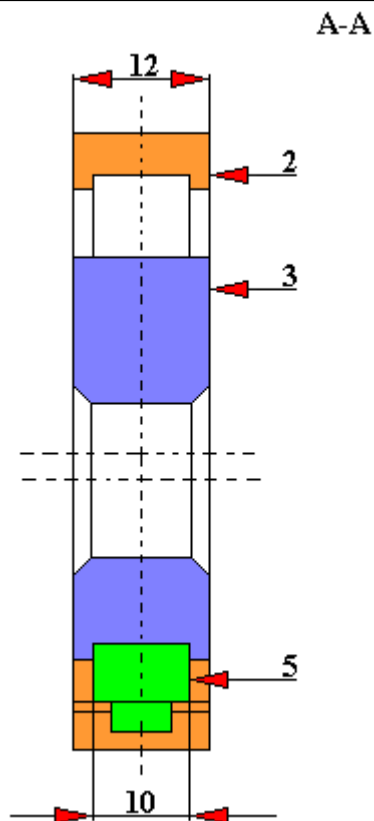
The holder for block-type samples used in the CML₂-2 (SMC-2) tribotester
